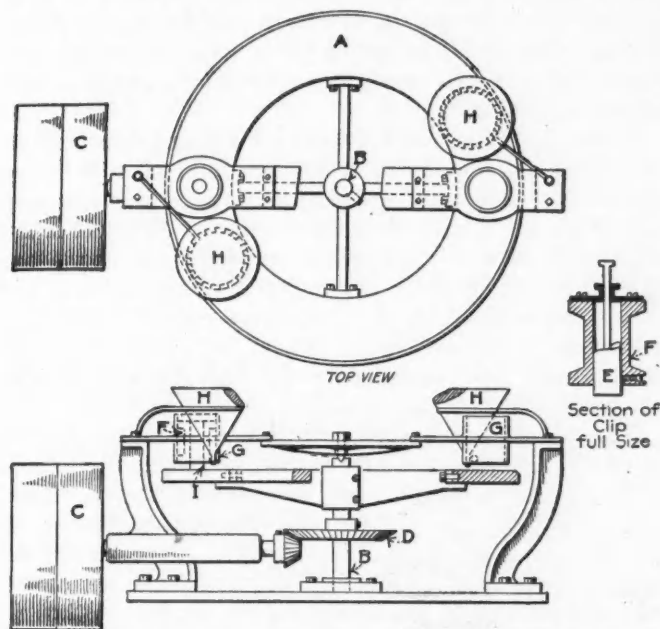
DETAILS OF DORRY HARDNESS MACHINE
